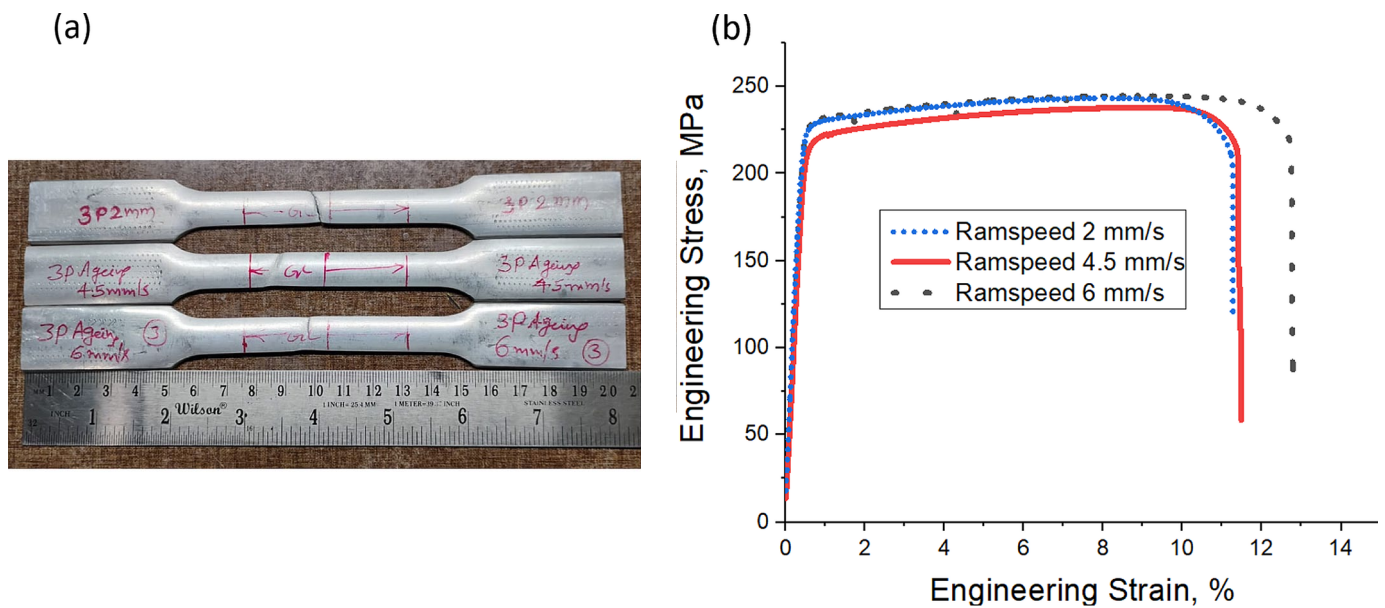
(a) Tensile samples after fracture (b) Engineering stress-strain graphs for samples extruded at 2, 4.5 and 6 mm/s ram speed
